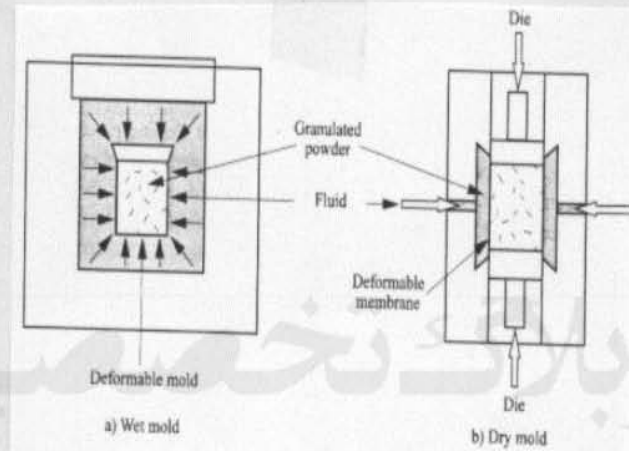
Principles of isostatic pressing: a) wet mold, b) dry mold
